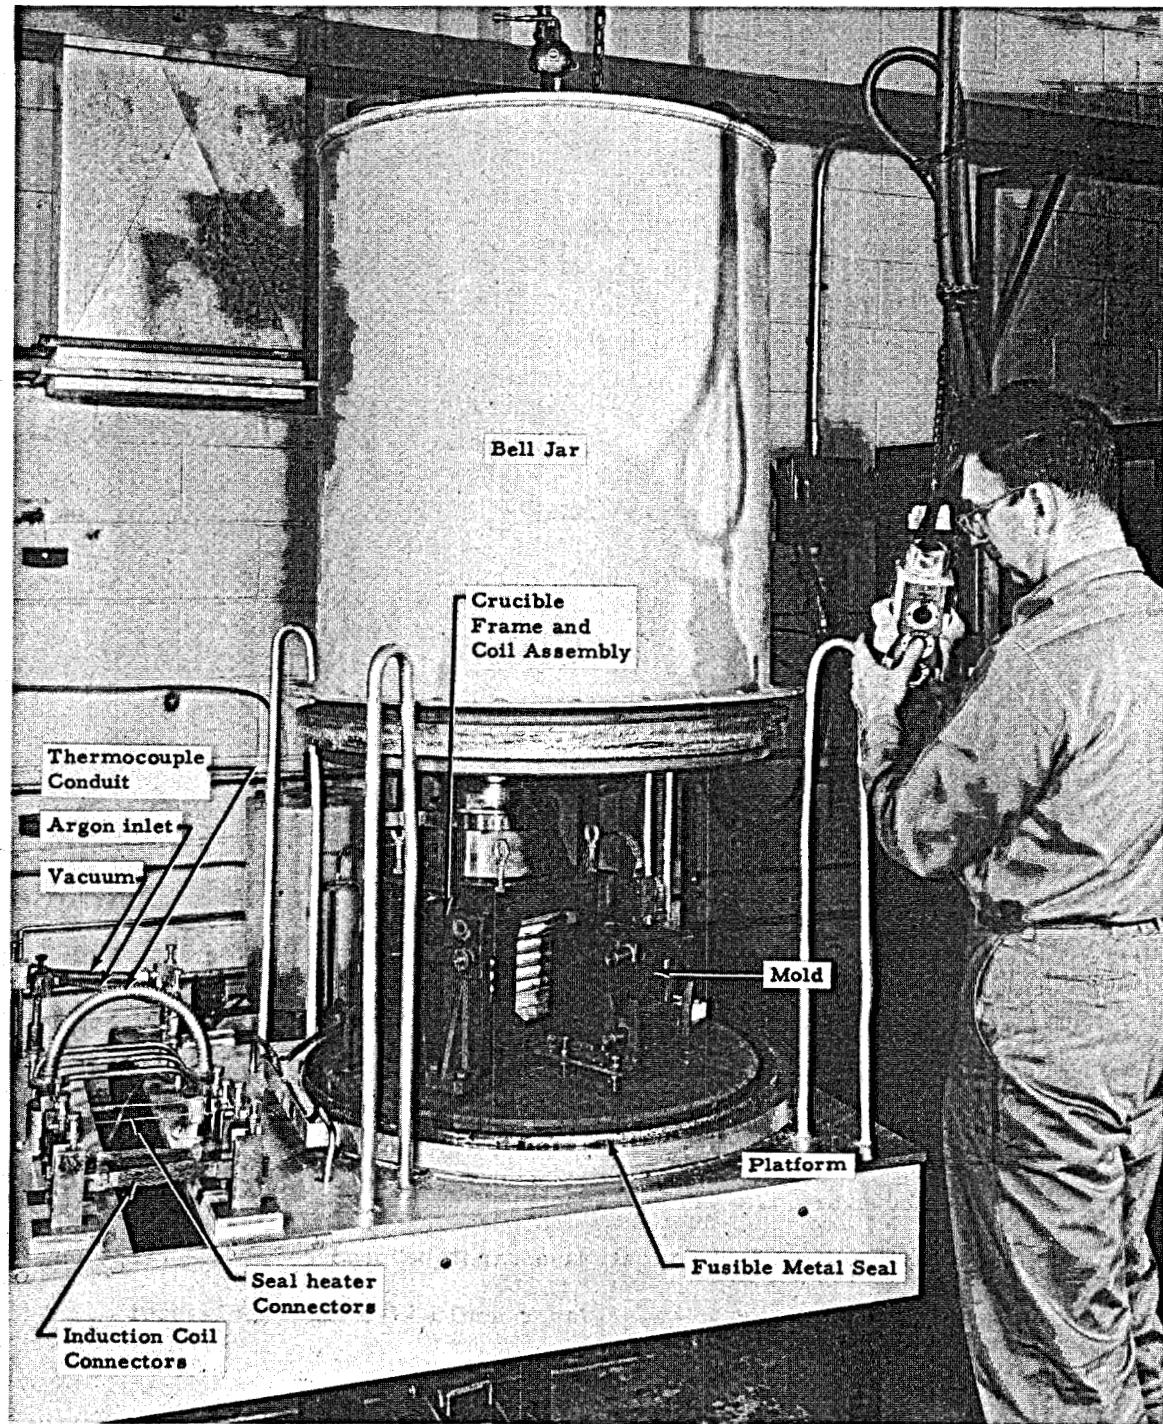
Uranium melting furnace - Bell jar partially removed.
